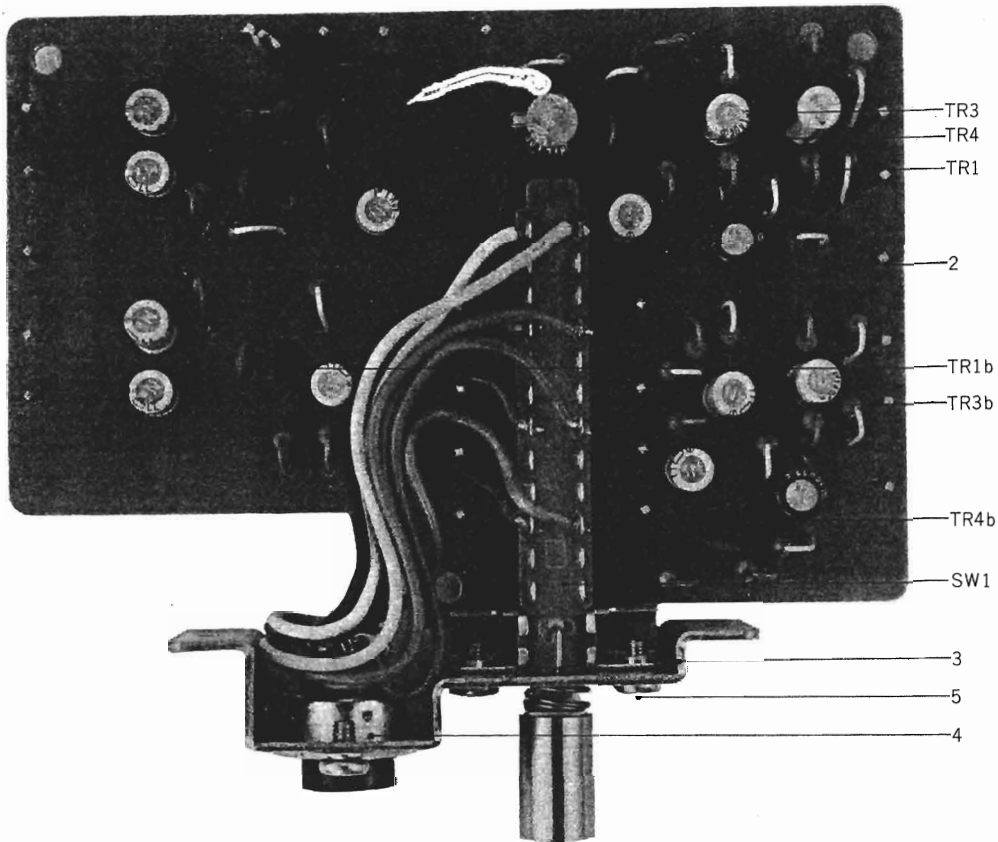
PHOTO OF VOL. P.C. BOARD (98-5006) BLOCK
